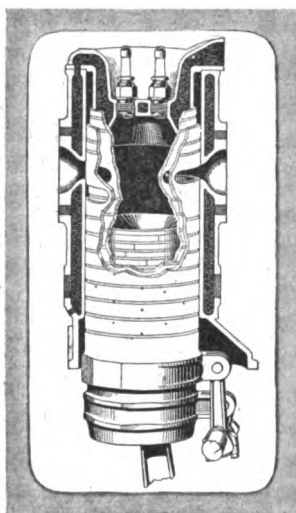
Section through a cylinder of the Stoddard-Dayton Knight motor
